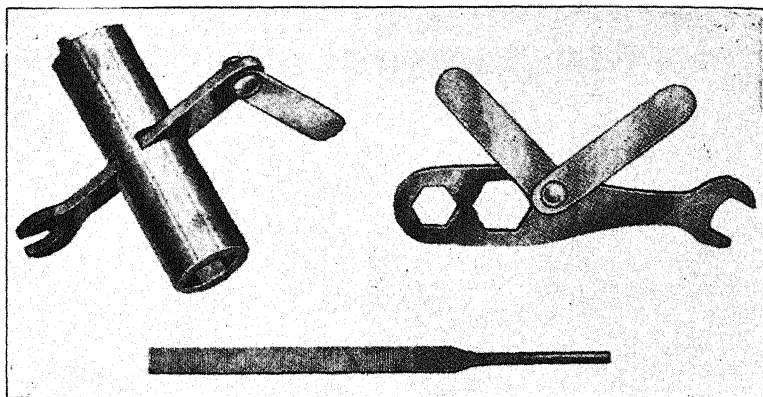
Magneto wrenches, gauges, and breaker-point file.
